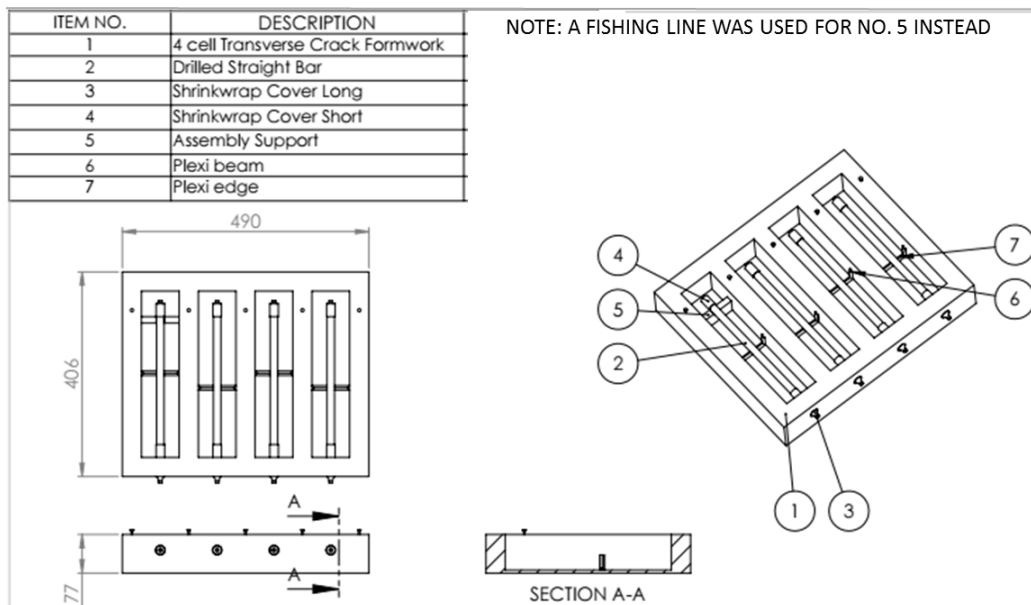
Schematic diagram of the layout for the transversely cracked specimen. The figure shows the plan, side-view and cross-section.
